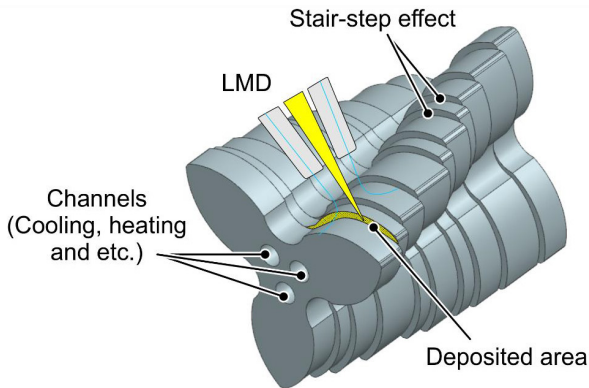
Cold forging die manufactured by hybrid laminated tooling method
